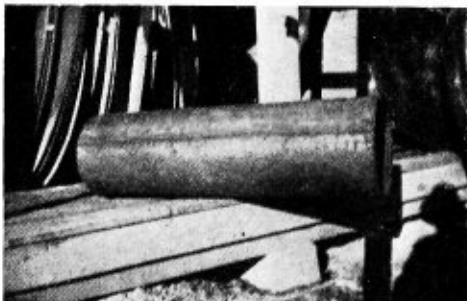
Tank No. 2. Electrically-Welded Tank After Test
